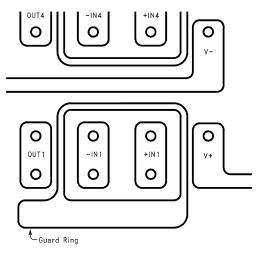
Example, using the LMC660, of Guard Ring in P.C. Board Layout
